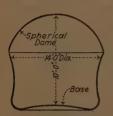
Diagrammatic sectional elevation of haystack boiler.
